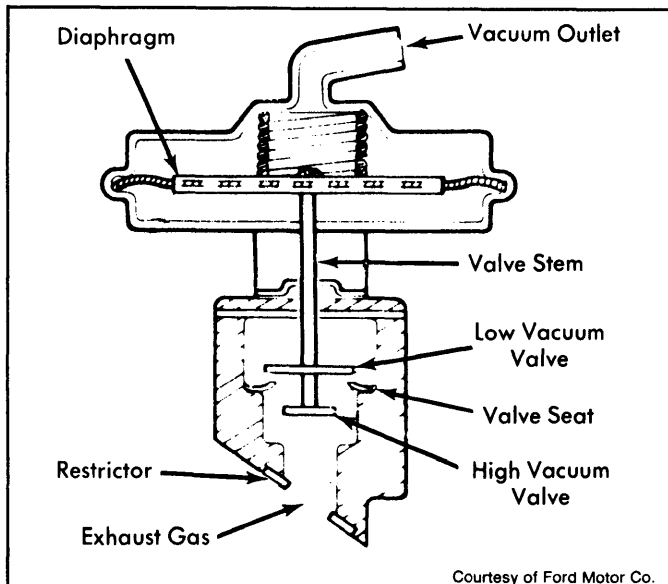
Sectional View of Typical EGR Valve Without Backpressure Transducer
